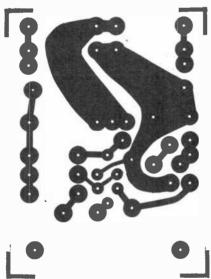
Actual-size printed circuit board etching guide is given at lower left. Component locations and orientations on circuit board are shown in photo. For proper heat sinking of SCR1, bolt its tab to mounting bracket used for circuit board as shown.
